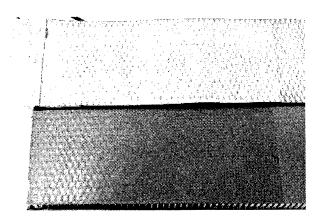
Failure surfaces resulting from peel testing of the Dura-Core honeycomb and JD Lincoln adhesive control specimen, indicating a mixture of cohesive failure and skin to adhesive failure.
